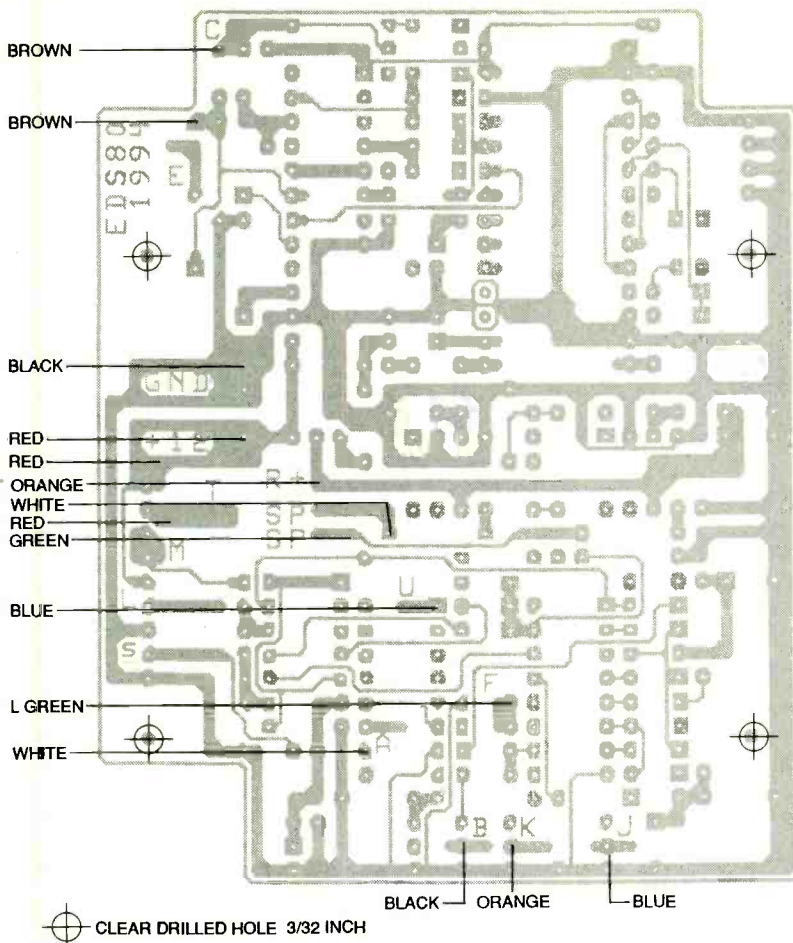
VOICE/OPTIONS PARTS PLACEMENT DIAGRAM reverse side. Wiring for the main alarm board is located here.
